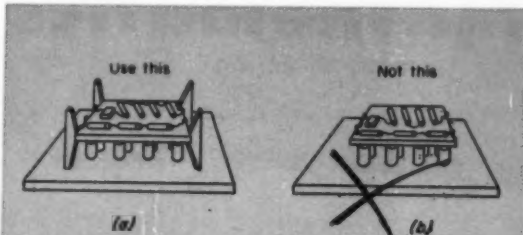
Chassis containing delicate components designed with rests or stands, *a*, is preferable to the design shown in *b*.
